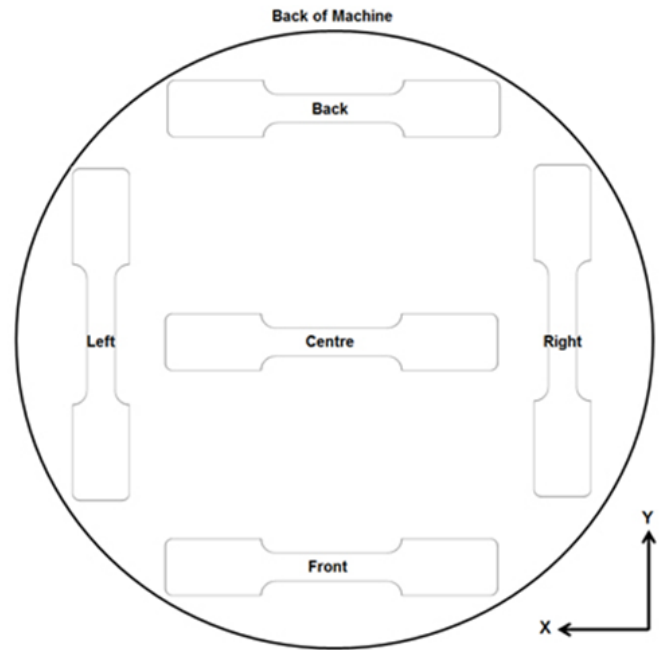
TENSILE TEST SPECIMEN LOCATION
